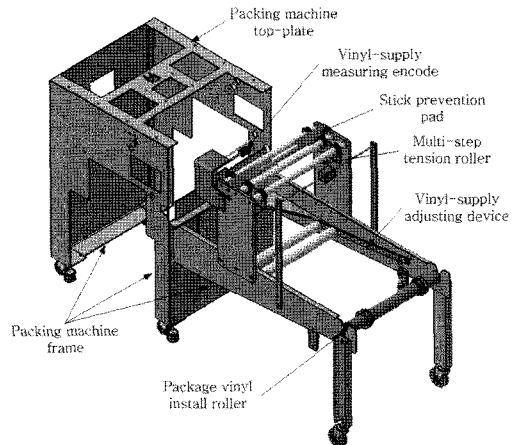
Composition and CAD model of machine support frame and package-bag supplying mechanism
